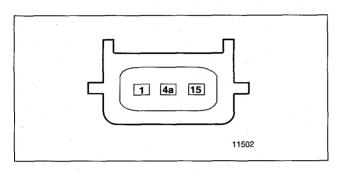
Ignition coil harness connector terminal identification for M42 engine.
